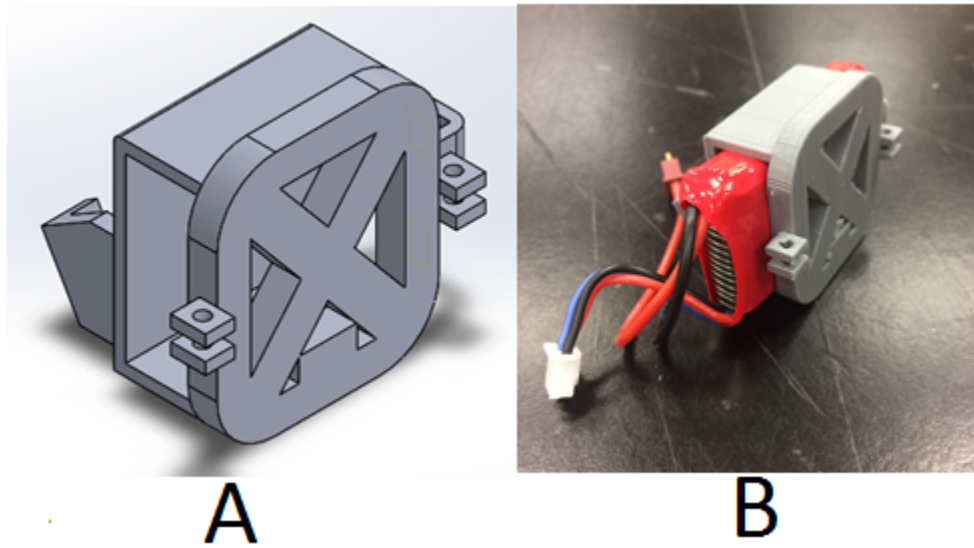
A) Solidworks Rendering of Front Section and B) Printed Part with Components
